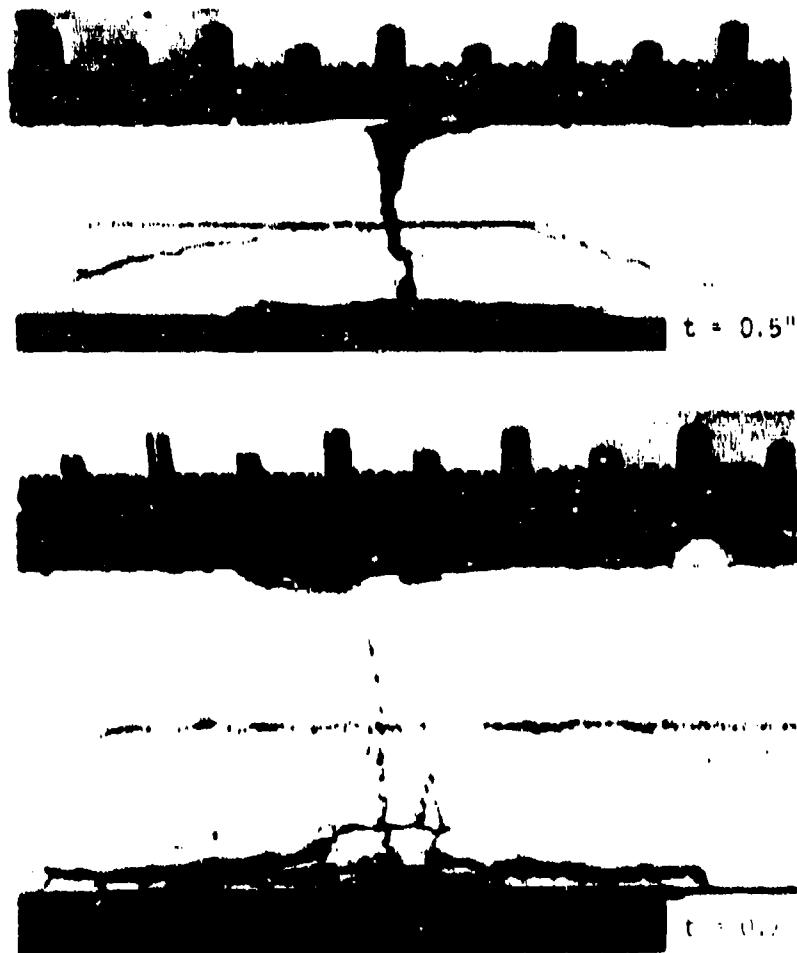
CRACKS IN DEFECTIVE TARGETS
